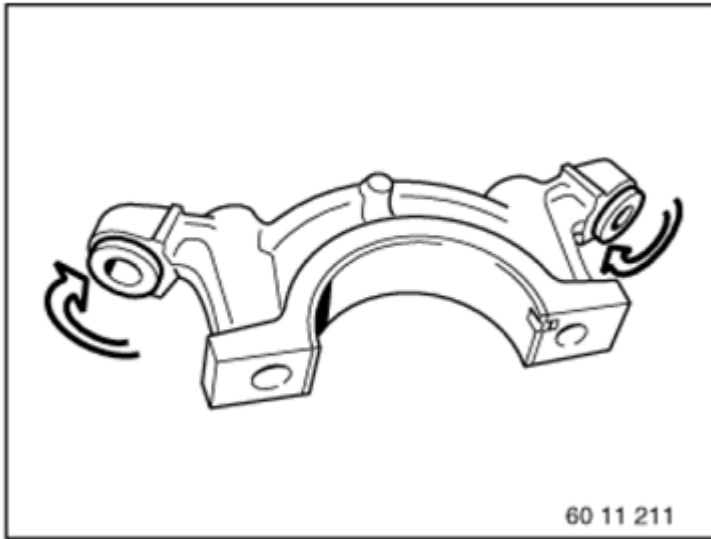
Turning Back Thread Support Bushing Into Main Bearing Cap
